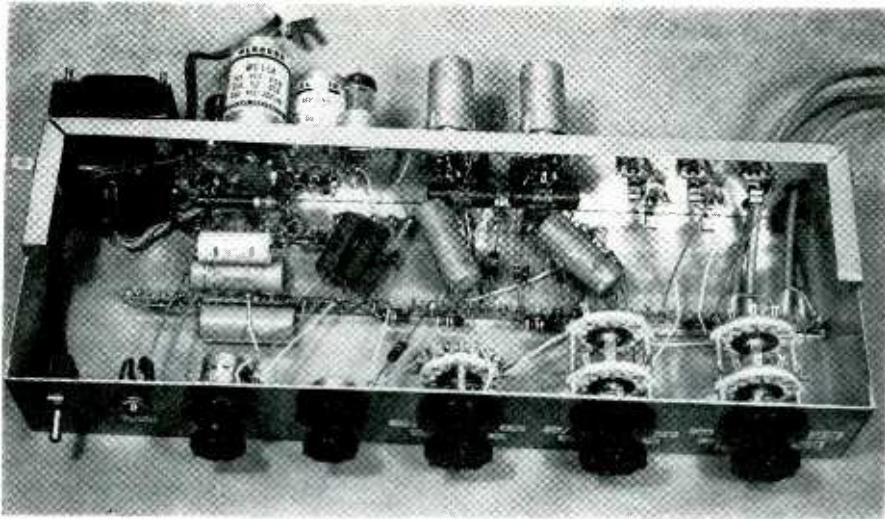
Bottom view shows uncluttered construction and the cutaway front edge which fits the carrying case.
